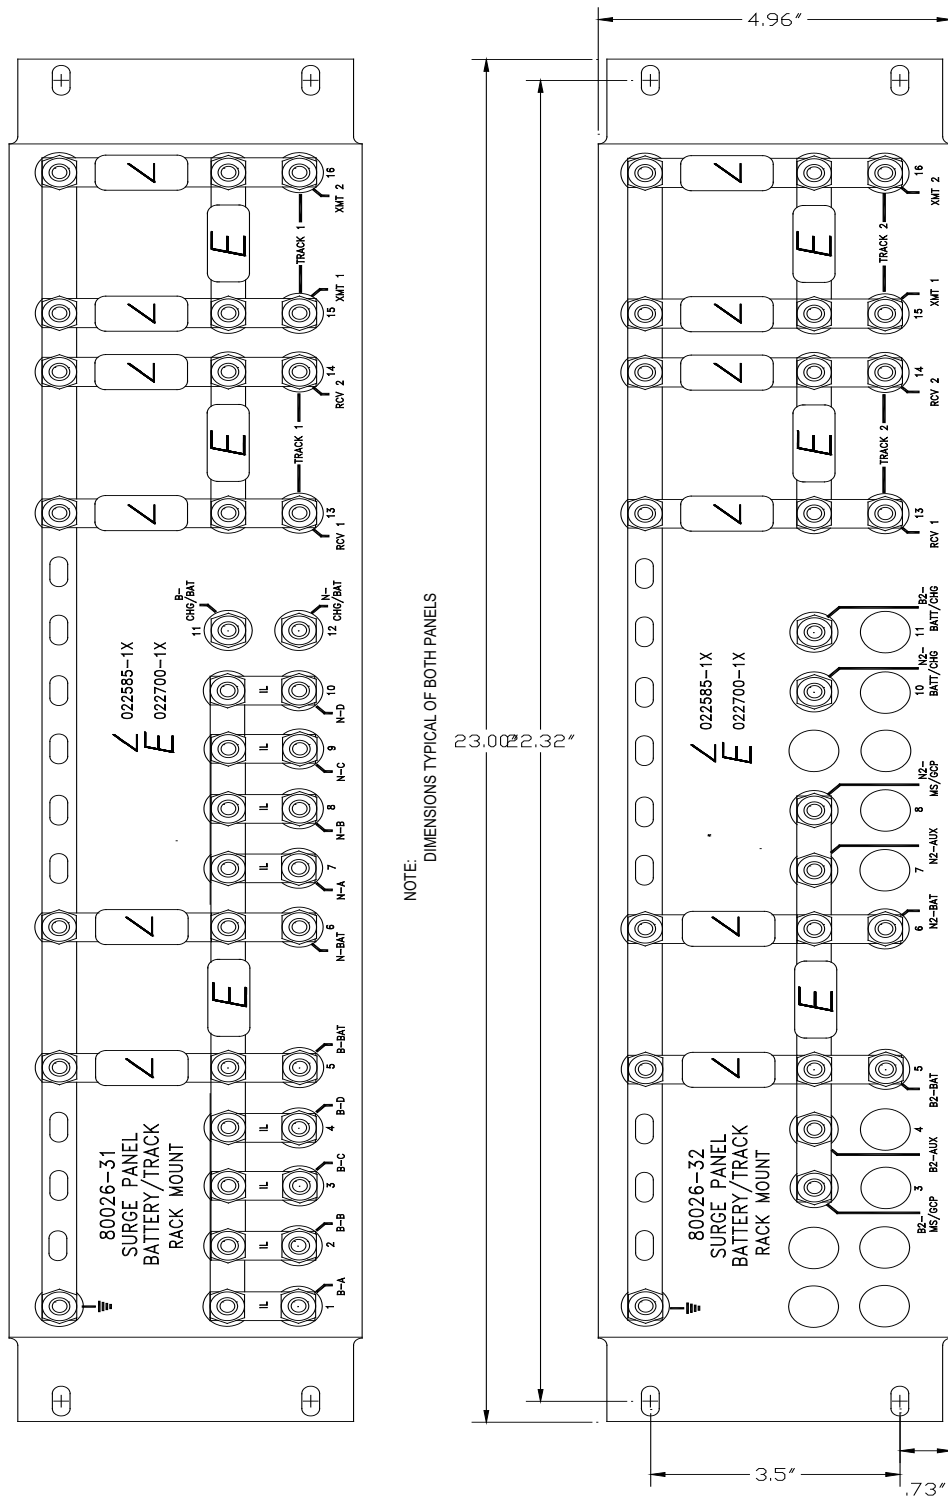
Rack Mounted Surge Panels, 80026-31 and -32
